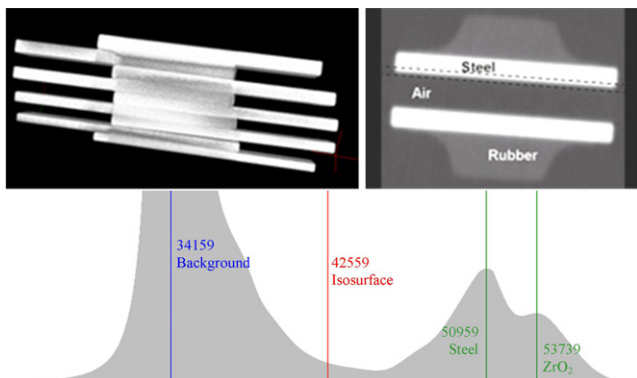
Multi-material measurements: top-left and bottom apply to alternating steel and ZrO₂ end gauges; top-right is a steel sleeve surrounded by rubber.
